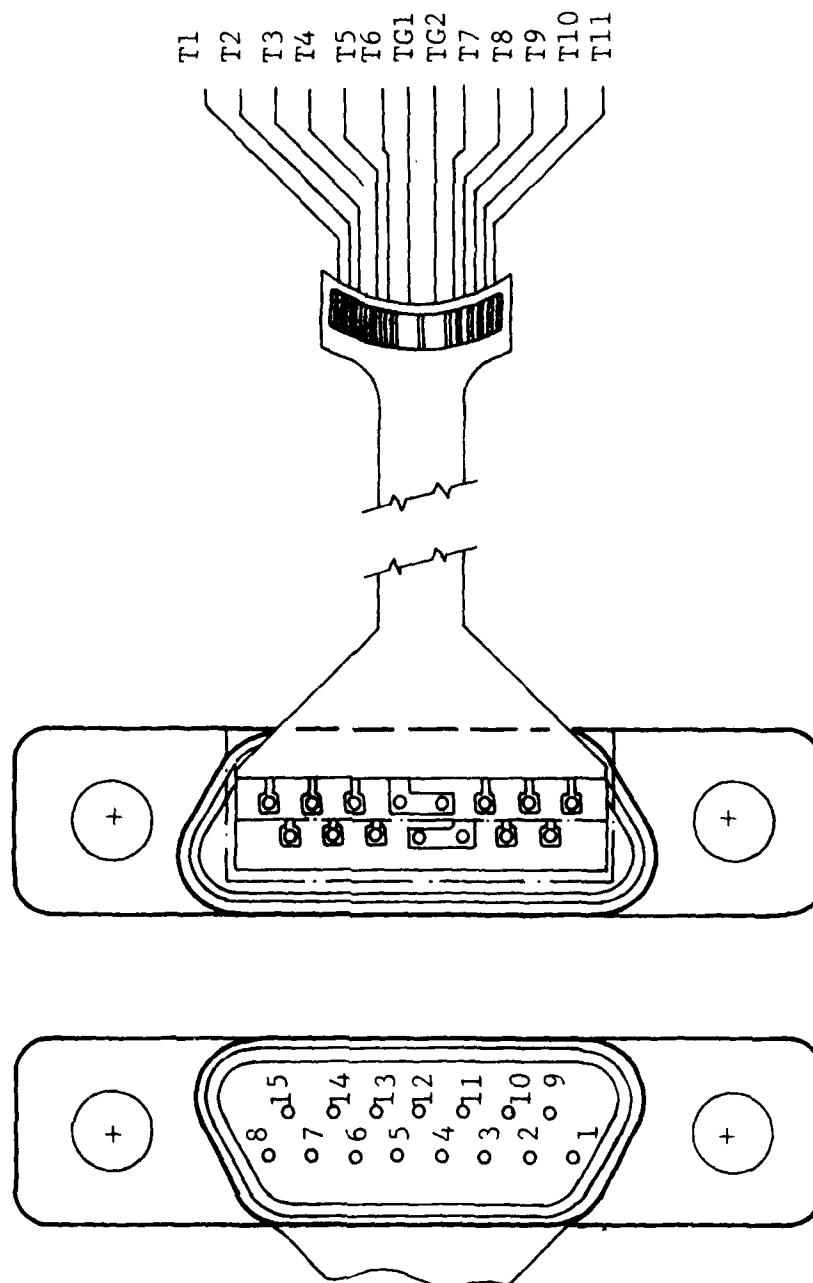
CABLE ASSEMBLY AND NUMBERING DESIGNATION
